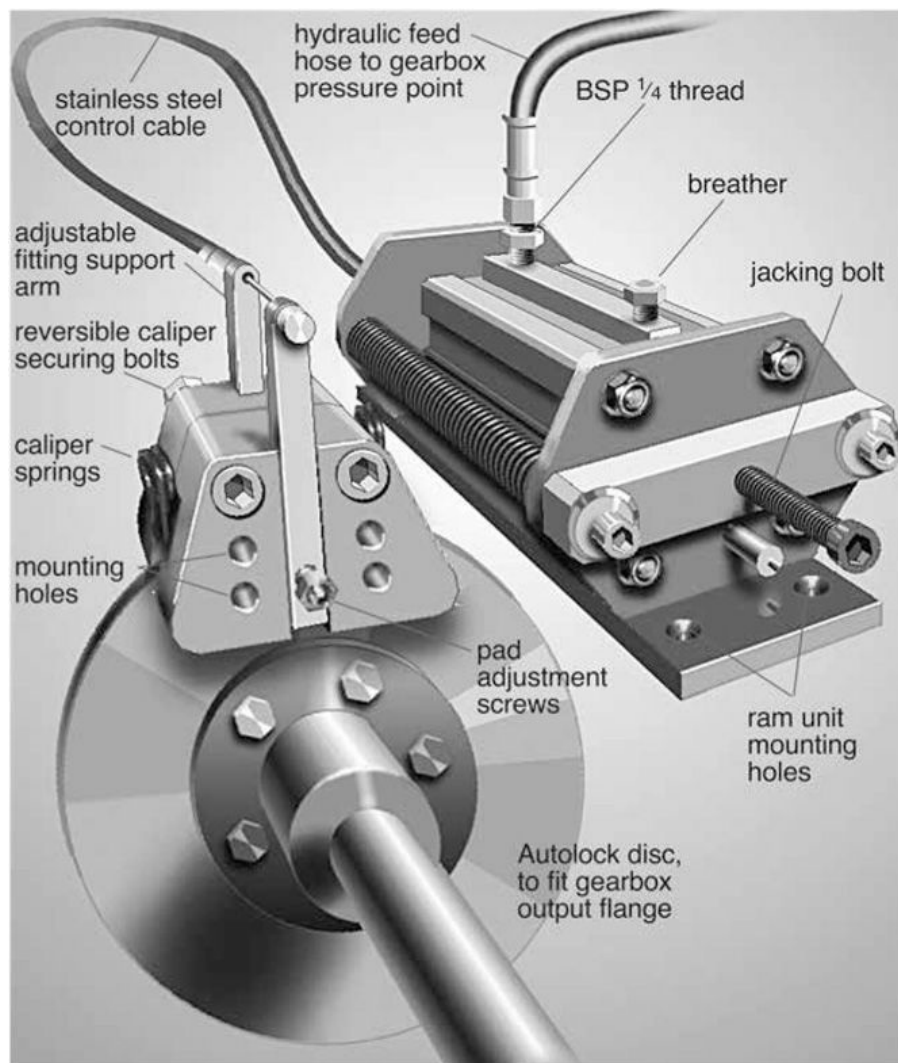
A hydraulic shaft lock. (Brunton's Propellers)
